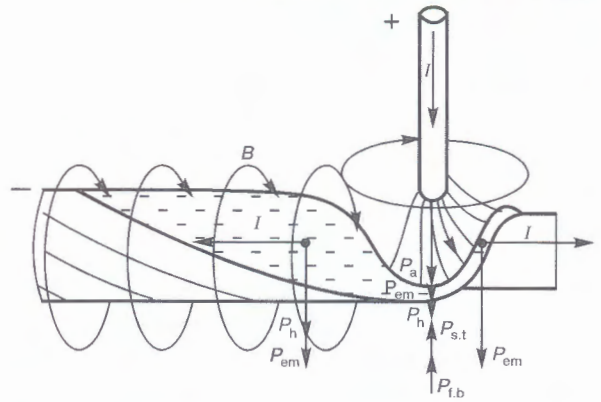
Schematic of forces acting on molten metal of the weld pool in one-sided welding on a flux backing: P_a — welding arc pressure; P_h — hydrodynamic pressure; P_{em} — electromagnetic pressure; $P_{s,t}$ — surface tension; $P_{t,b}$ — flux backing pressure
